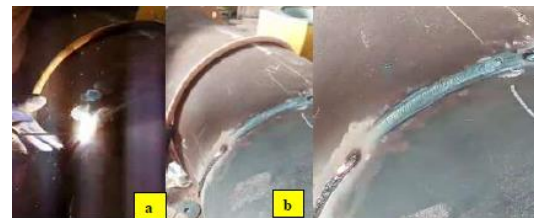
a. SMAW Welding Process and b. SMAW weld results on A106 Gr.B Carbon Steel Pipe
